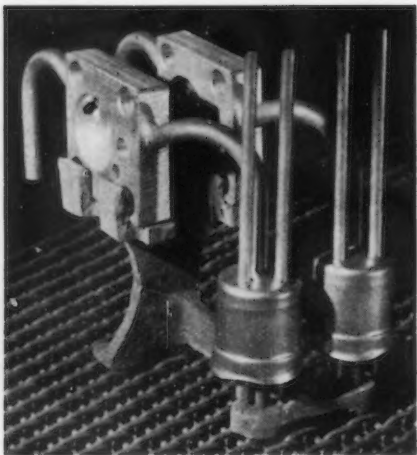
Cast-alloy fixtures are invaluable for supporting assemblies in upright position to obtain proper flow of copper into the joints.
